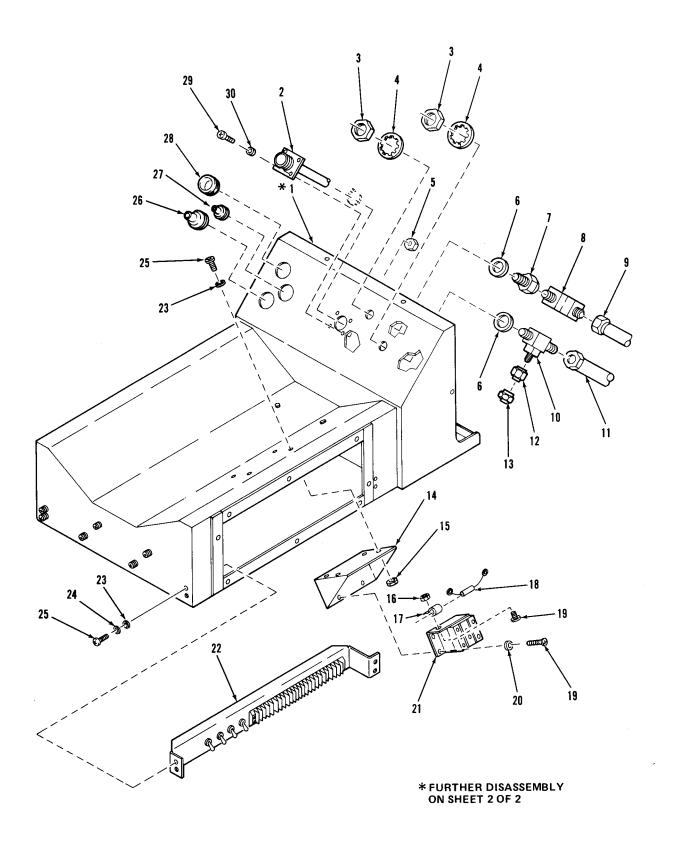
Equipment Container Assembly (Sheet 1 of 2)
